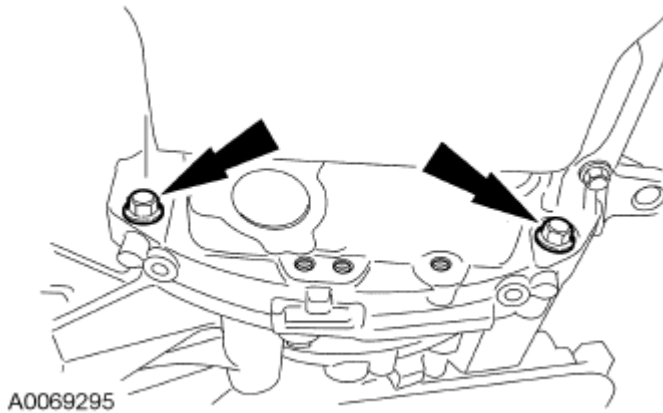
Locating Oil Pan-To-Bell Housing Bolts
